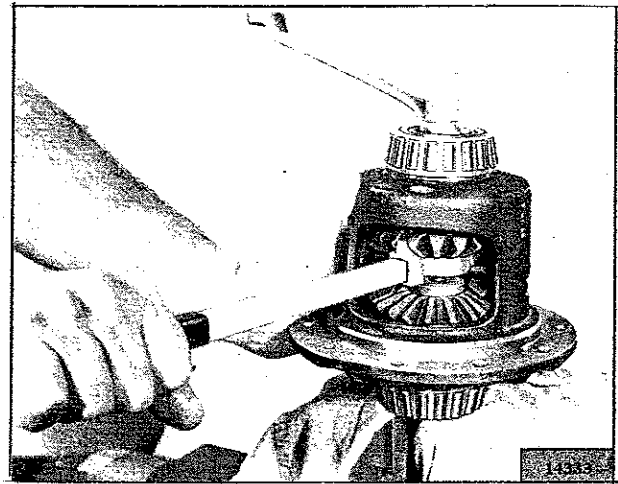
ROTATING PINION MATE GEARS INTO POSITION
